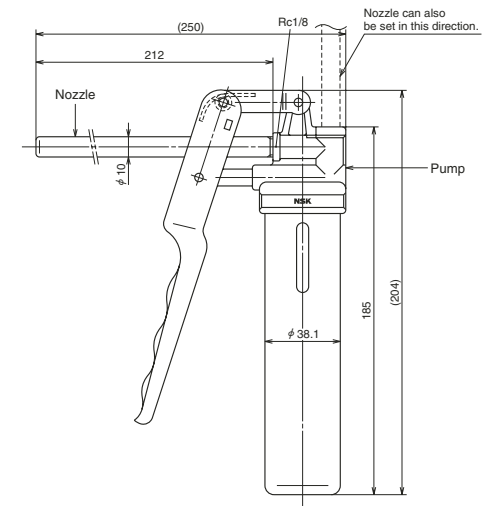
NSK Hand Grease Pump with NSK straight nozzle
